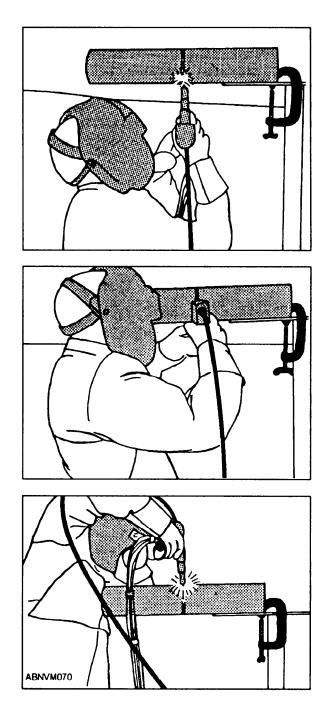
CMA gun manipulation for welding pipe in the horizontal fixed position.
